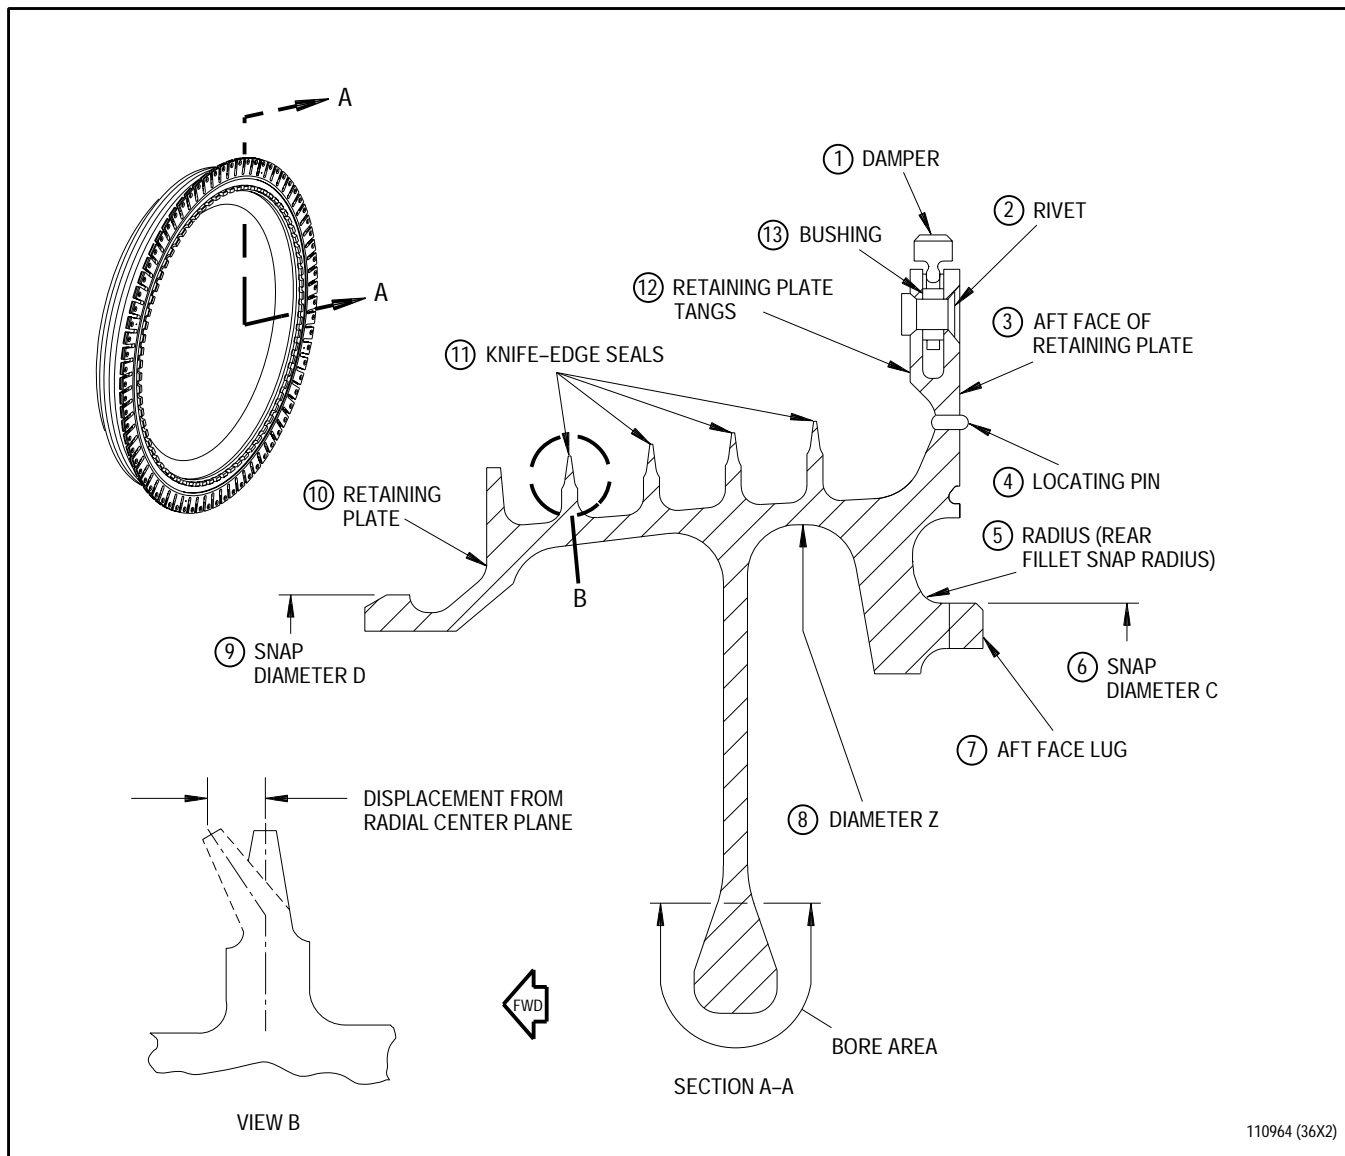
Second Stage Turbine Blade Retaining Plate Assembly - Inspection (Sheet 1 of 2)
